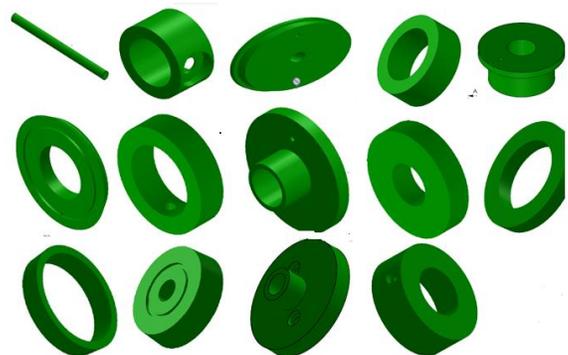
3D Part Diagrams for Welding Fixture
